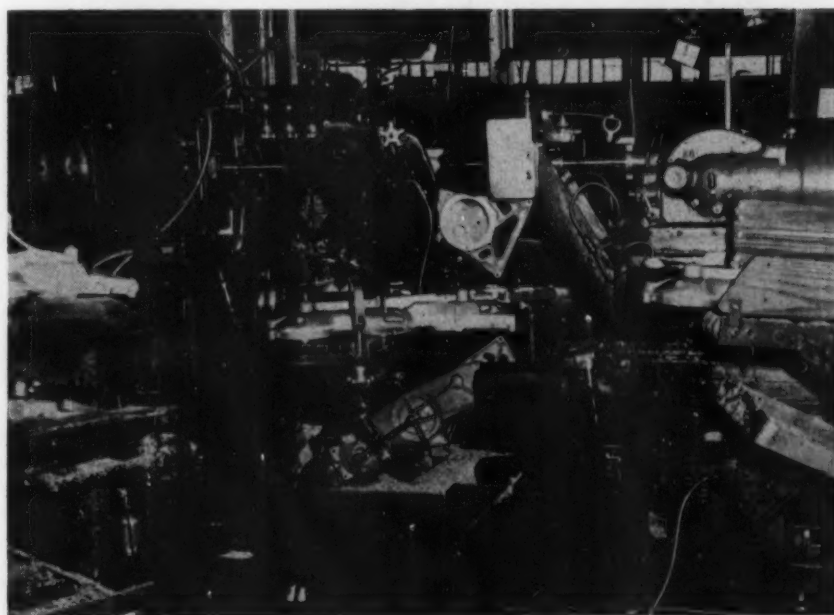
A special machine equipped with five No. 30 Kingsbury tool heads drill, spot face and ream the holes for worm bearings in the gearcase.
